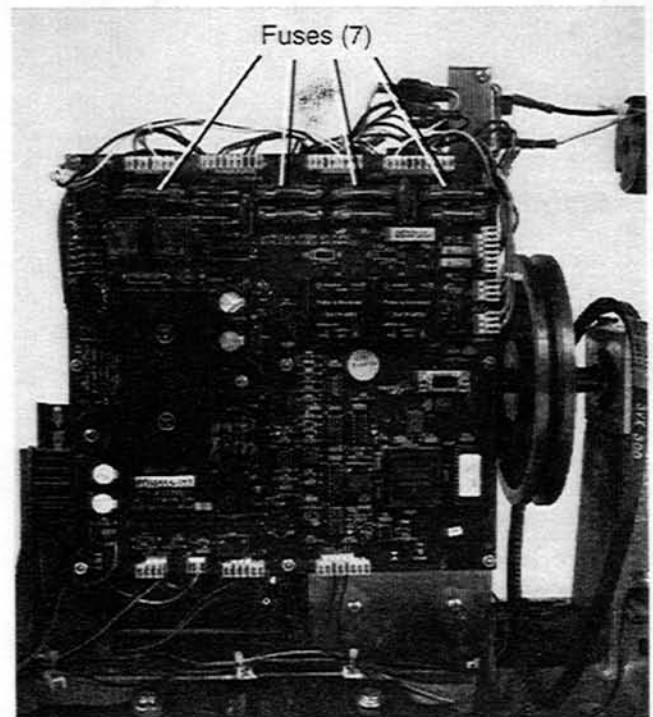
Fuses F1-F7 on TMU PCB Assembly
